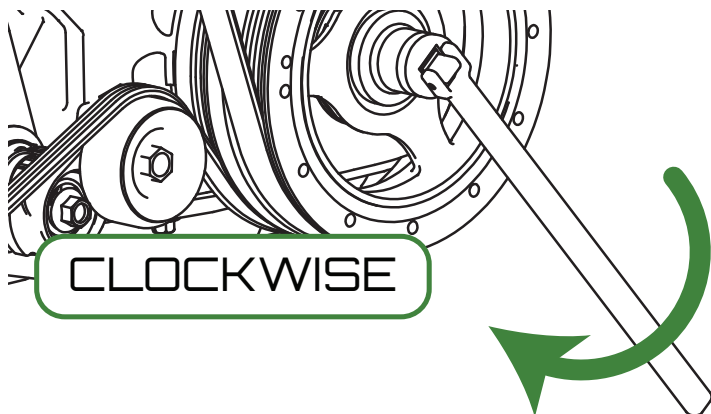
Rotating the Engine Crankshaft with a Breaker Bar
